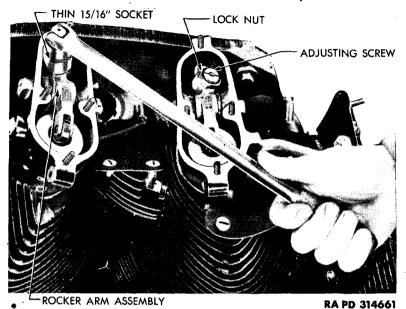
Loosening Rocker Arm Adjusting Screw Lock Nut
